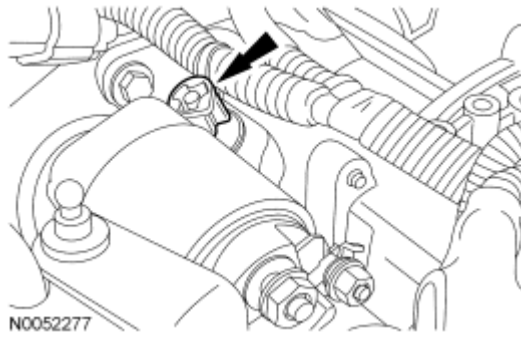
Identifying Wiring Harness Retainer From Starter Motor Stud Bolt
